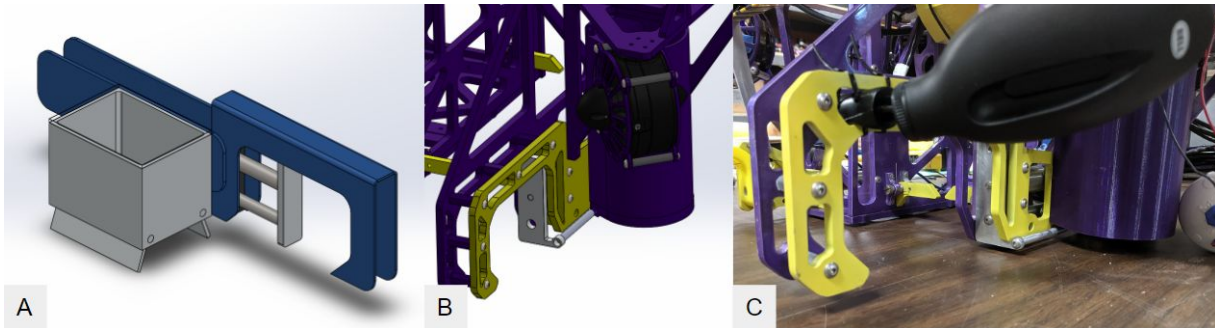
Smarthook and drop box development: initial model (A), final CAD (B) and final assembly with the rear view mirror (C).
